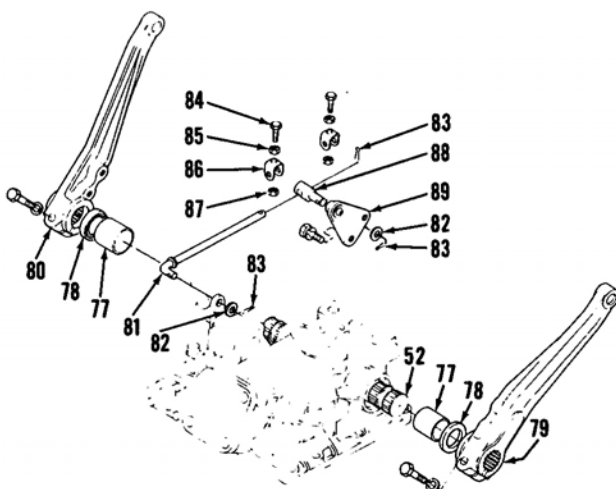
Exploded view showing rocker shaft, lift arms and control rod assembly typical of all models.
